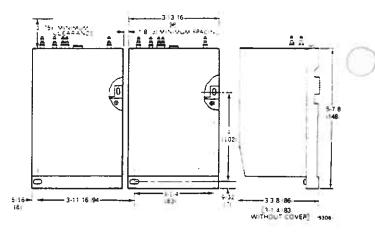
RP920B, C, and D Dimensions in Inches (Millimeters).
